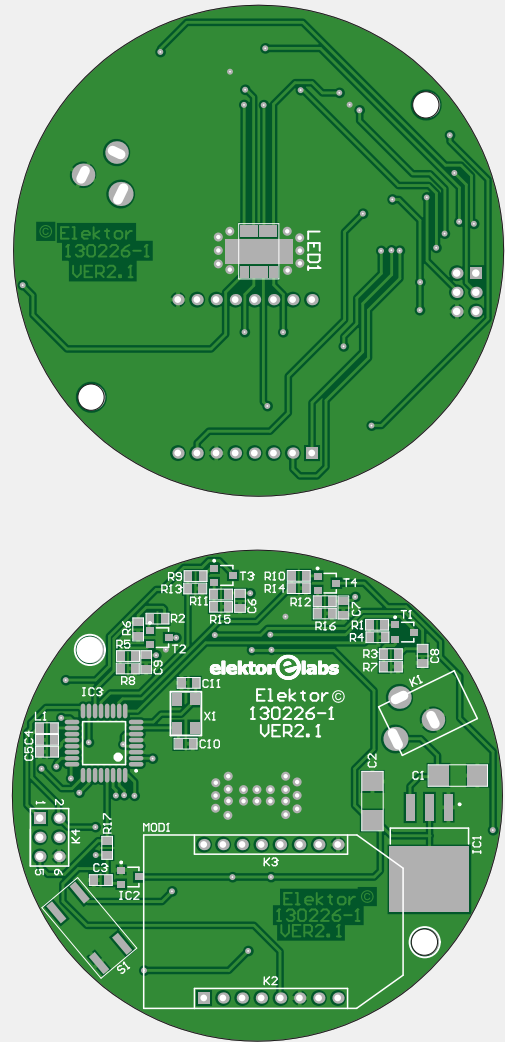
Printed circuit board design for the Lumina lamp board. The round shape facilitates incorporating the board into a lamp base. Board available from the Elektor STORE.
